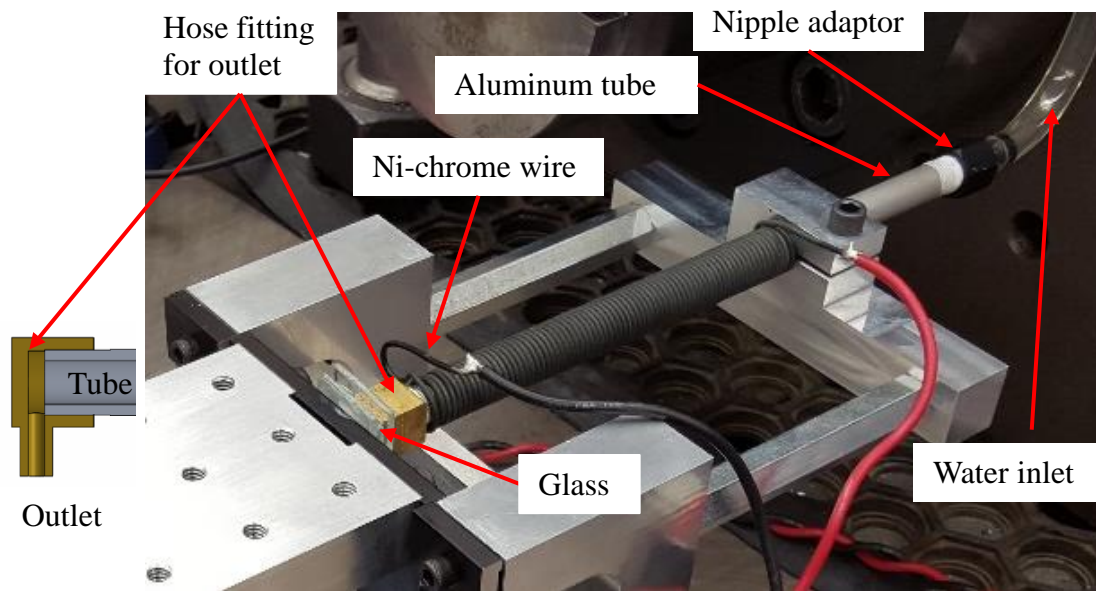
A nipple adaptor is threaded on one side of the tube used for passing cooling water into, another end is threaded on hose fitting for the outlet.
